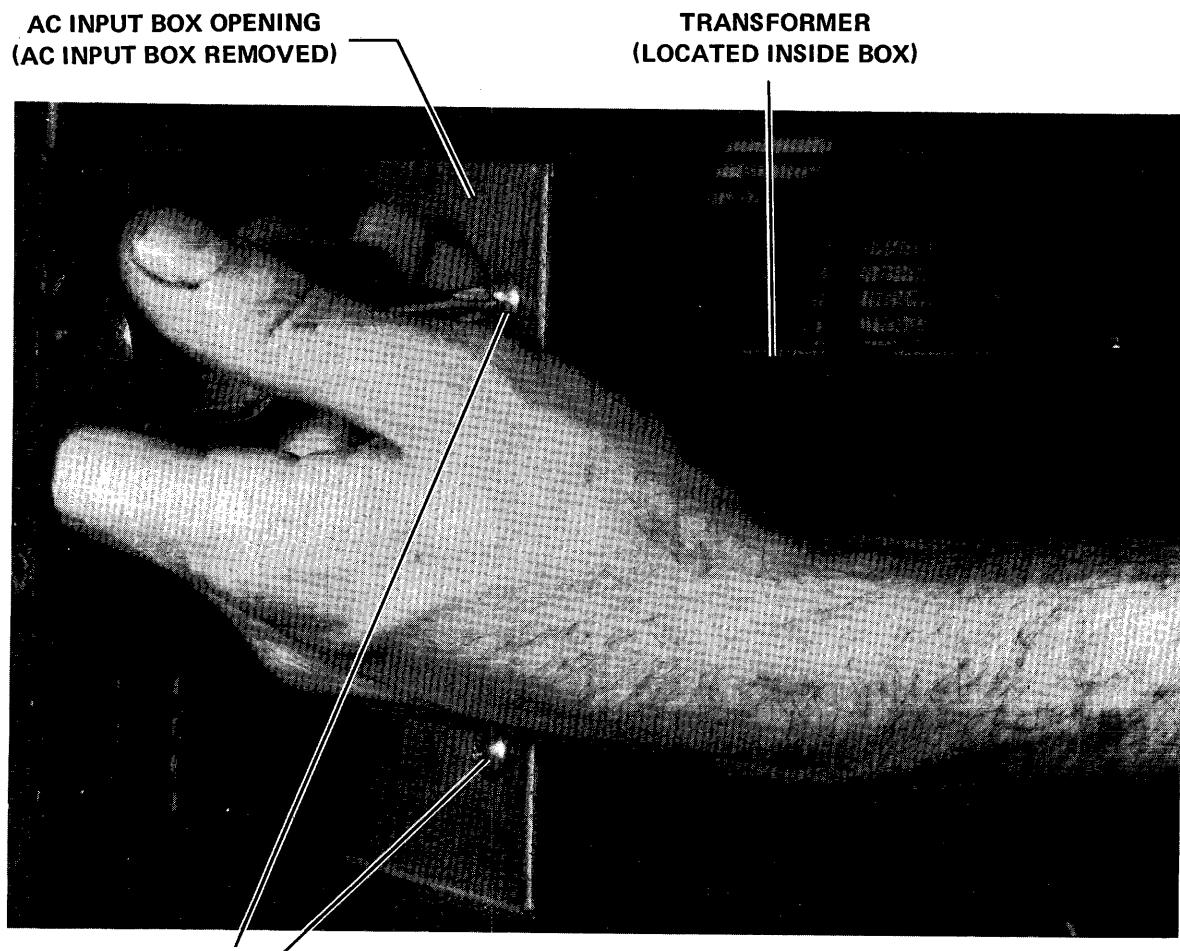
Transformer Assembly Removal (Sheet 1 of 2)
